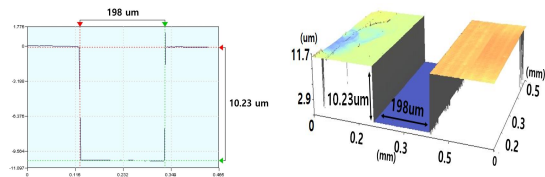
Cross-sectional view of and three-dimensional view of nano filter area on the micro mold
